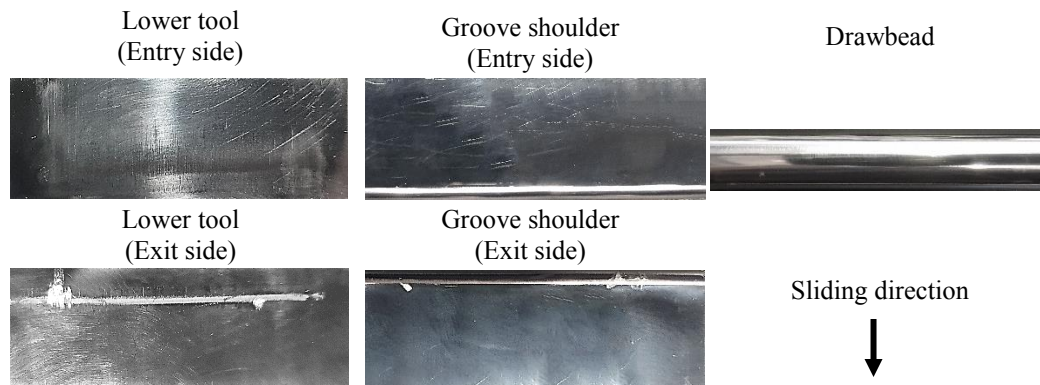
Surface structure of the drawbead tool tested with EN 1.4301 stainless steel and a 3mm bead penetration after 23 strokes.
